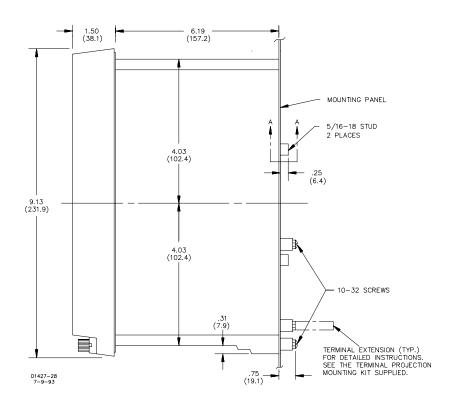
S1 Case, Single-Ended, Projection Mounting, Outline Dimensions, Side View
